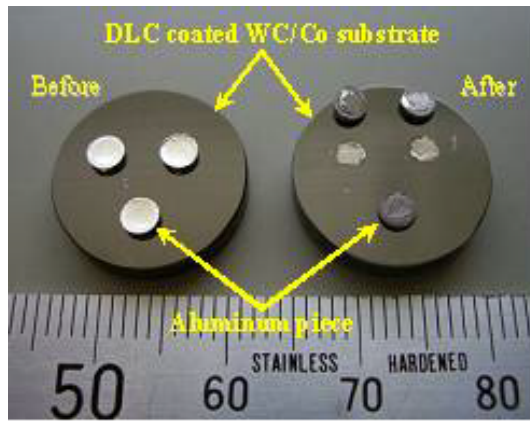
Photograph of DLC coated specimen for welding proof.
